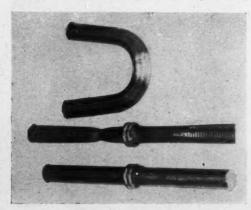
The bottom view shows two 2-in. diameter mild steel bars which have been joined by friction welding. Other 3-in. diameter friction welded mild steel bars on which tensile and bending tests have been carried out are seen in the centre and at the top
